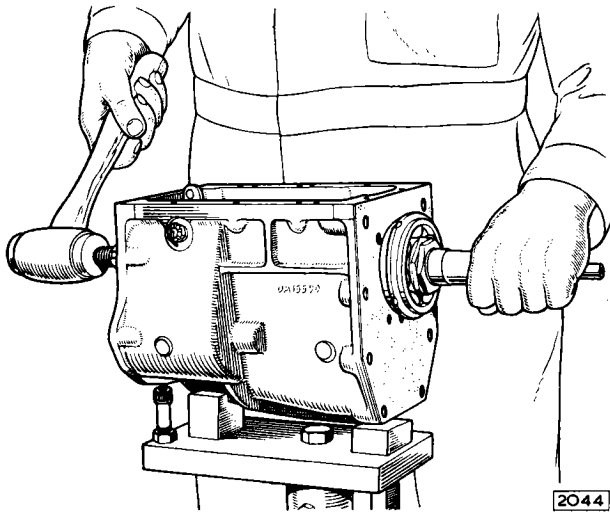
The constant pinion shaft is removed by tapping the mainshaft forward.
